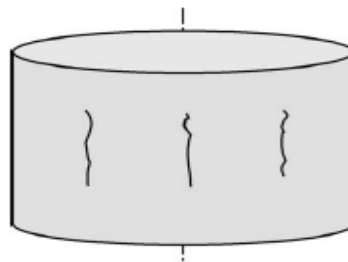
Thermal fatigue cracks aspect.
